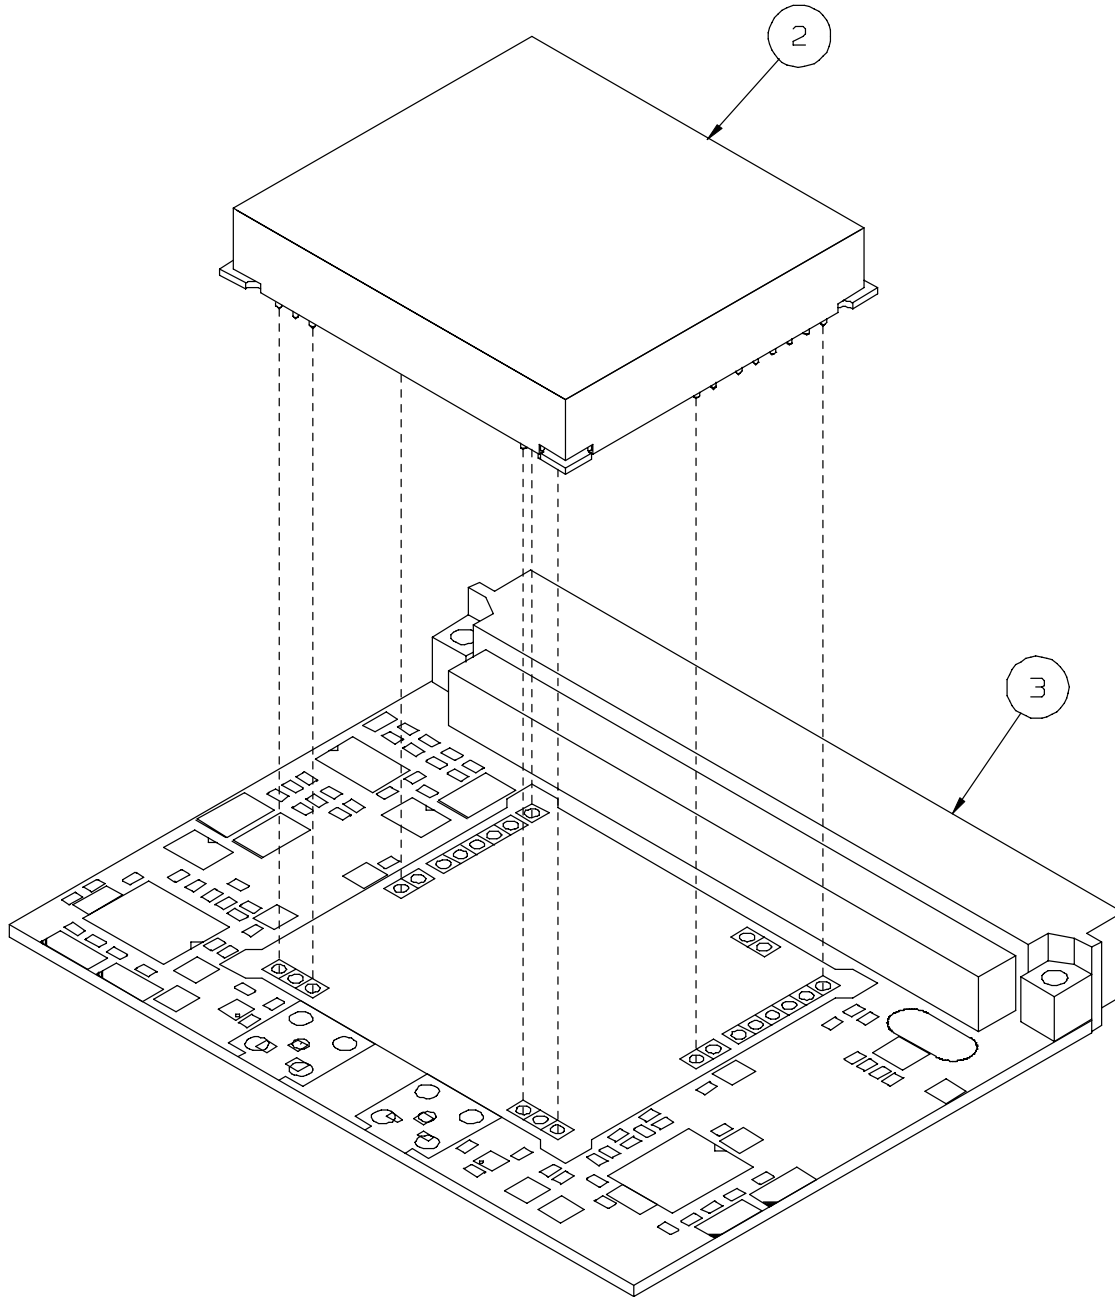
Fig C-g Installation of MDC-2500 Assembled Printed Circuit Board
